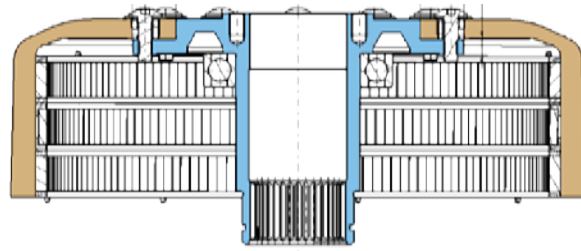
Cut through the GFRP-rotor (light brown) and the drive shaft (blue) using a screwed joint
